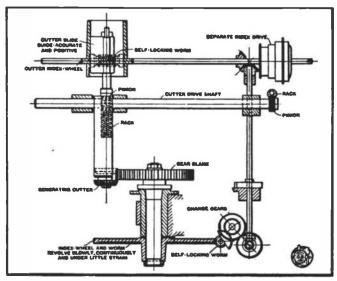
Diagram explaining action of gear shaper indexing mechanism
